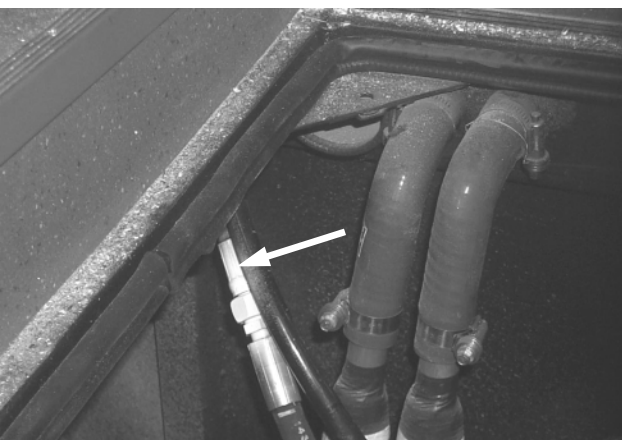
Below the aisle front trap door - T2145 - central tunnel line to steering gearbox line connection. Check one crimp fitting.
